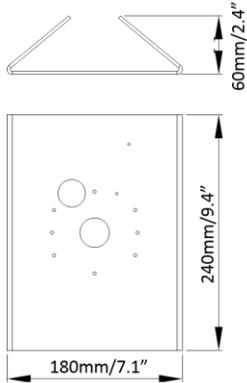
PHYSICAL DIMENSION OF POLE MOUNT BRACKET
